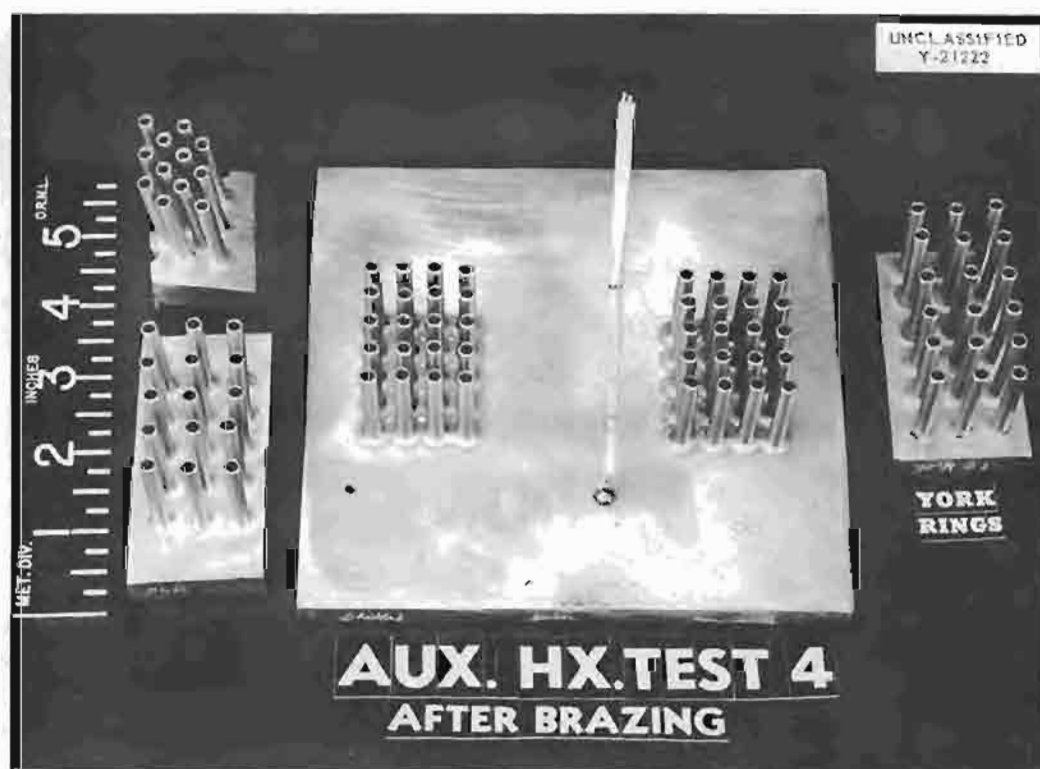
Tube-to-Header Test Assembly After Brazing at 100°F/hr Rate of Temperature Rise.
